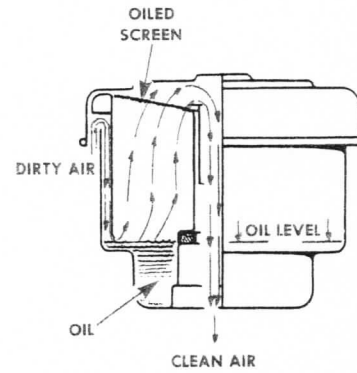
A cutaway view of an oil bath air cleaner. (Briggs & Stratton Corp.)
